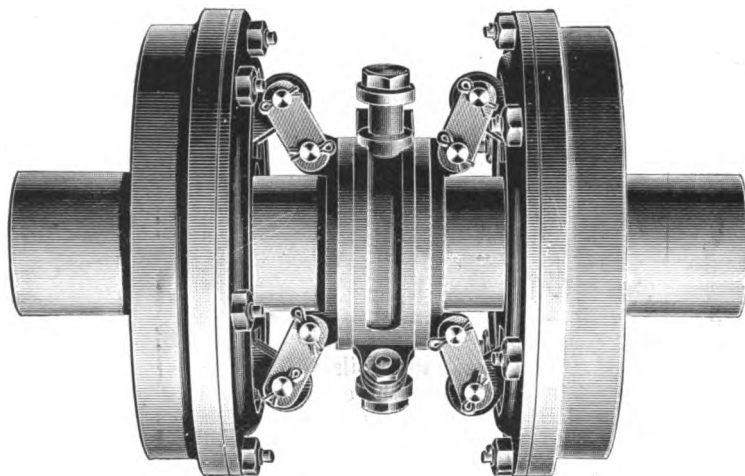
THE CHAMPION DOUBLE CLUTCH.
